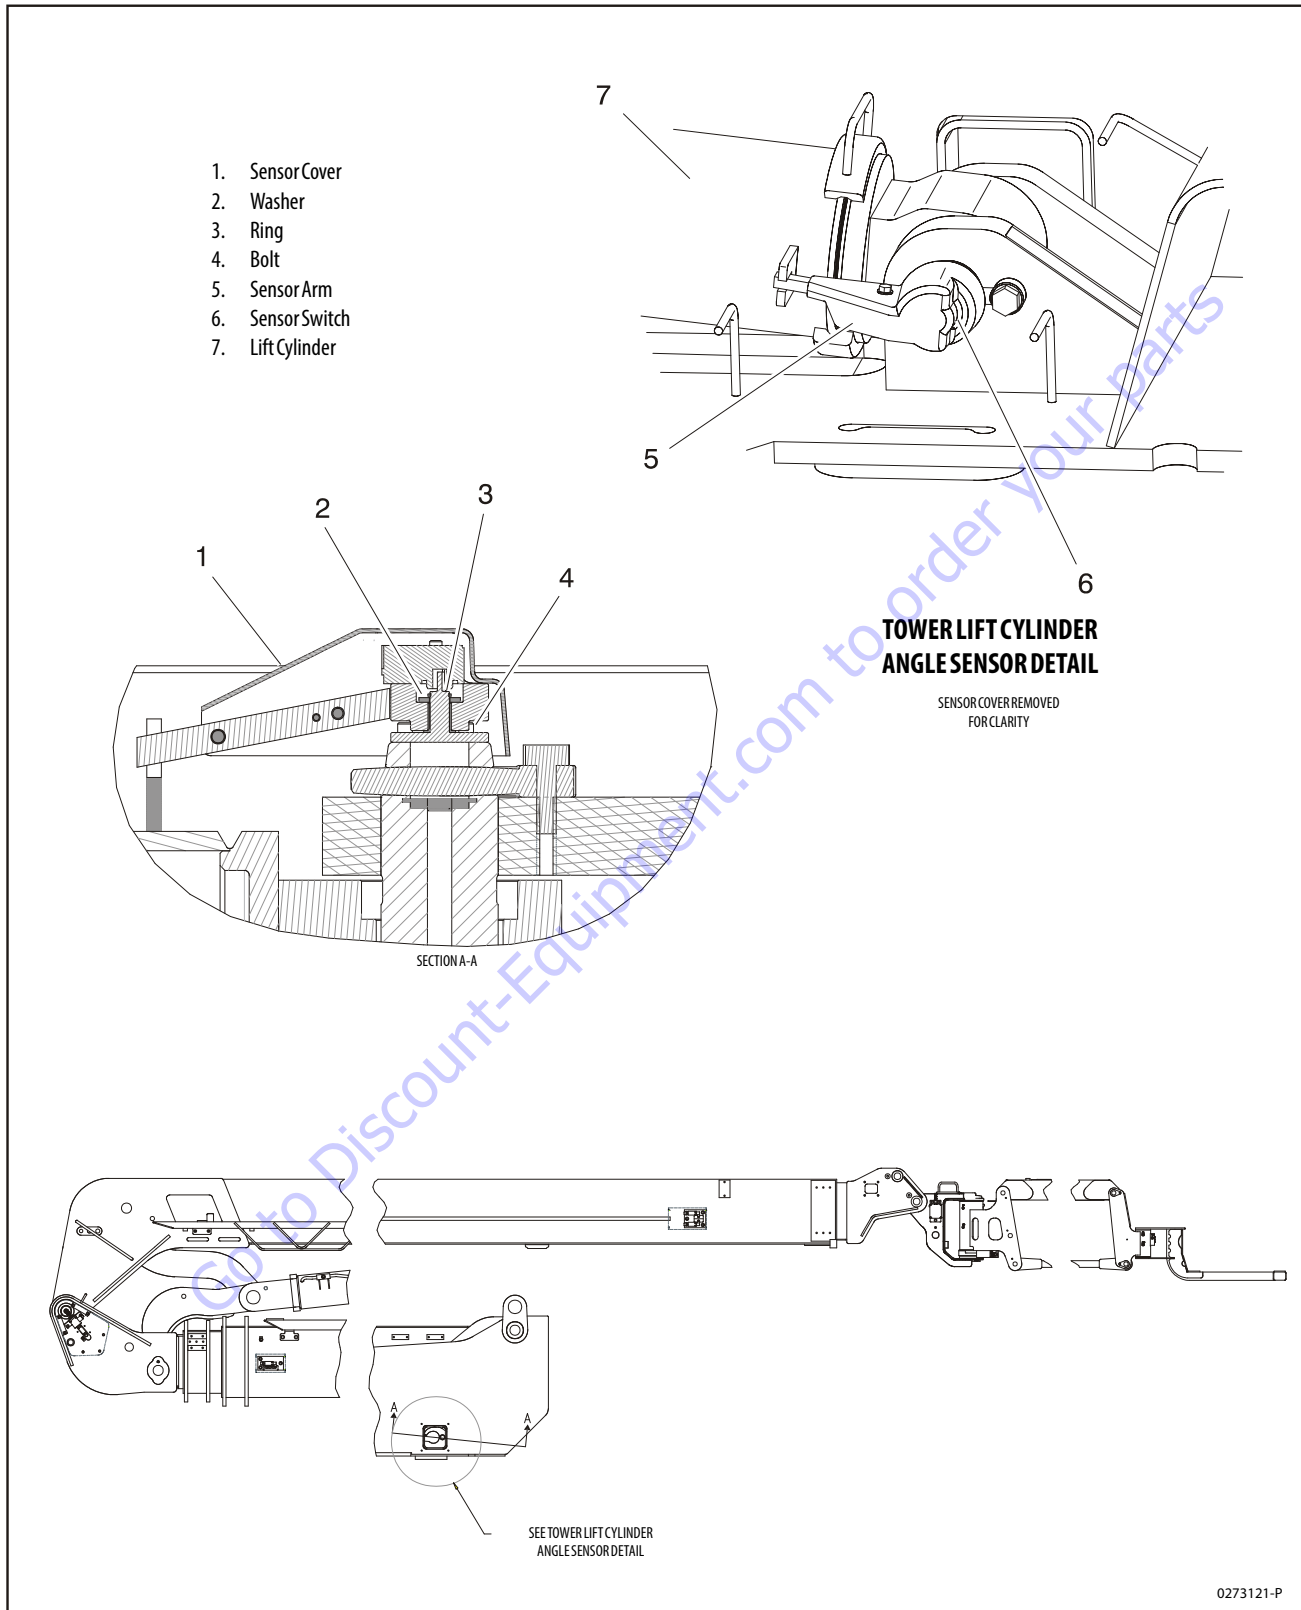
Boom Sensor Locations - Tower Lift Cylinder Angle Sensor
